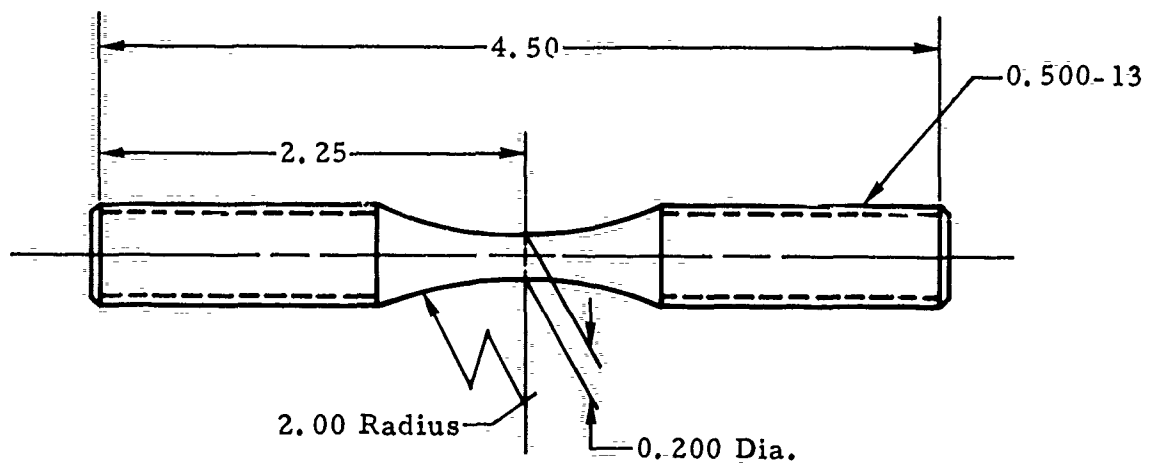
Smooth Bar High-Cycle Fatigue Test Specimen.
